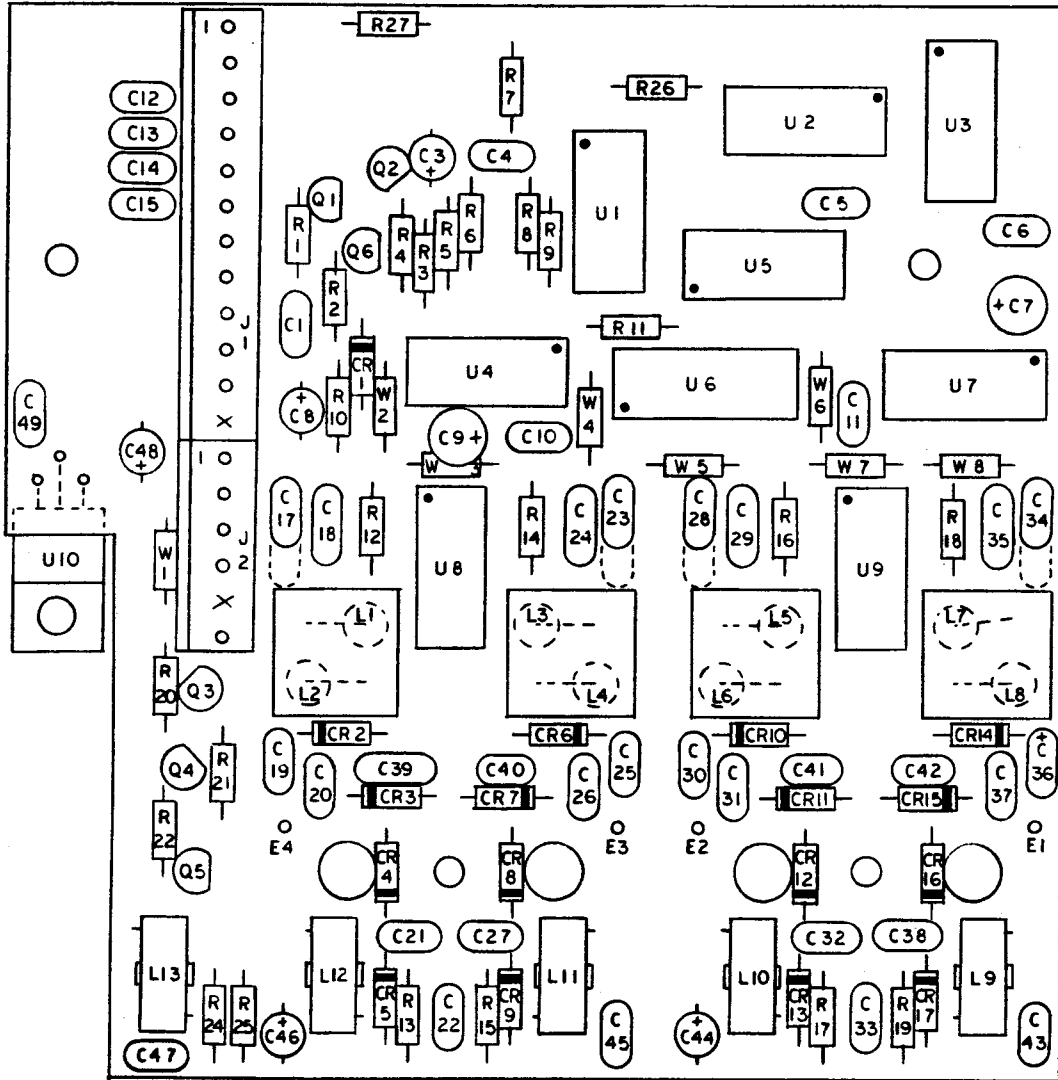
A4 COMPONENT LOCATION ASSEMBLY DRAWING
